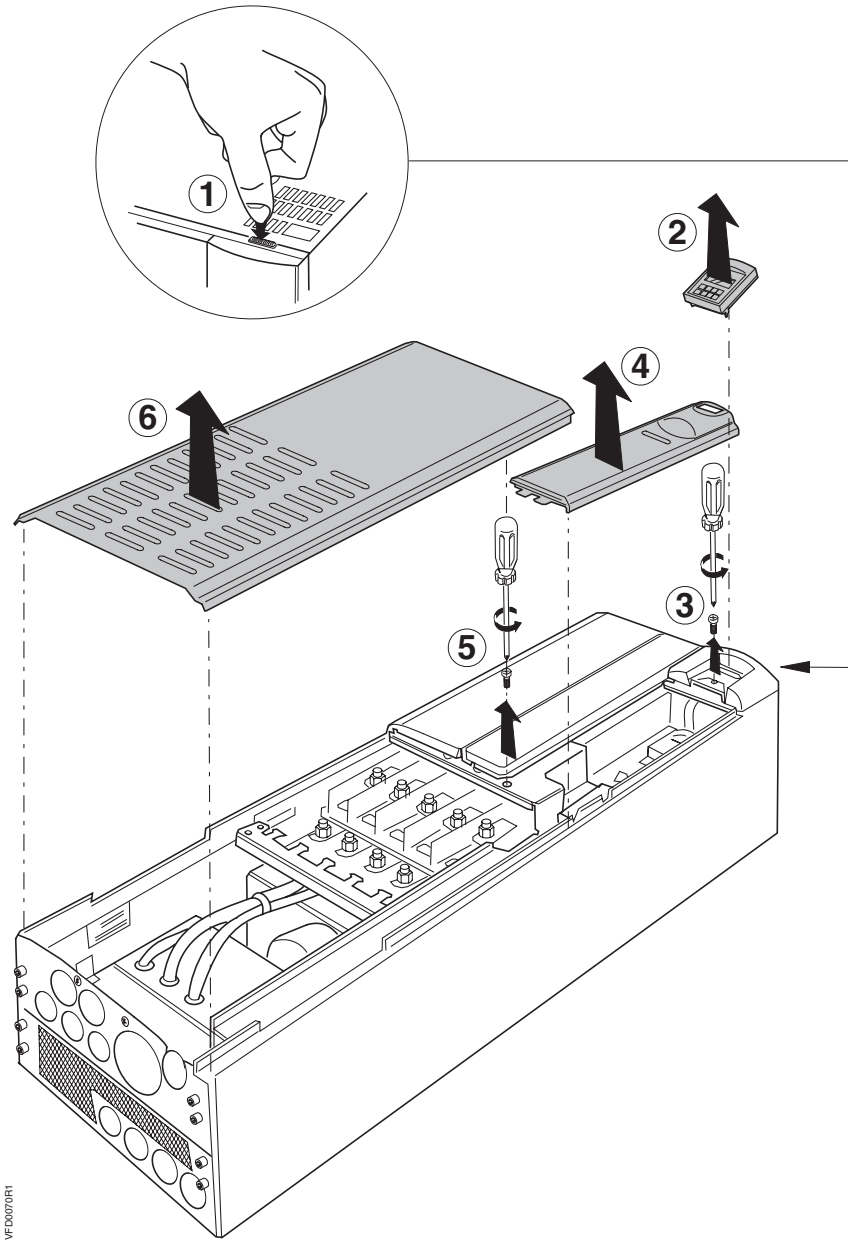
Access to Connection Terminals for SED2 Frame Size F.
